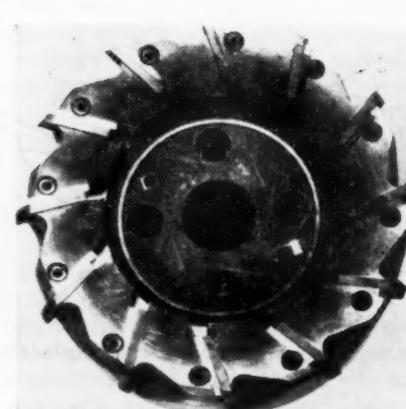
CUTTER 10 IN. DIAM WITH 12 INSERTED BLADES AT 15-DEG POSITIVE SECONDARY RADIAL RAKE ANGLE WITH NEGATIVE PRIMARY RADIAL RAKE ANGLE AT CUTTING EDGE
